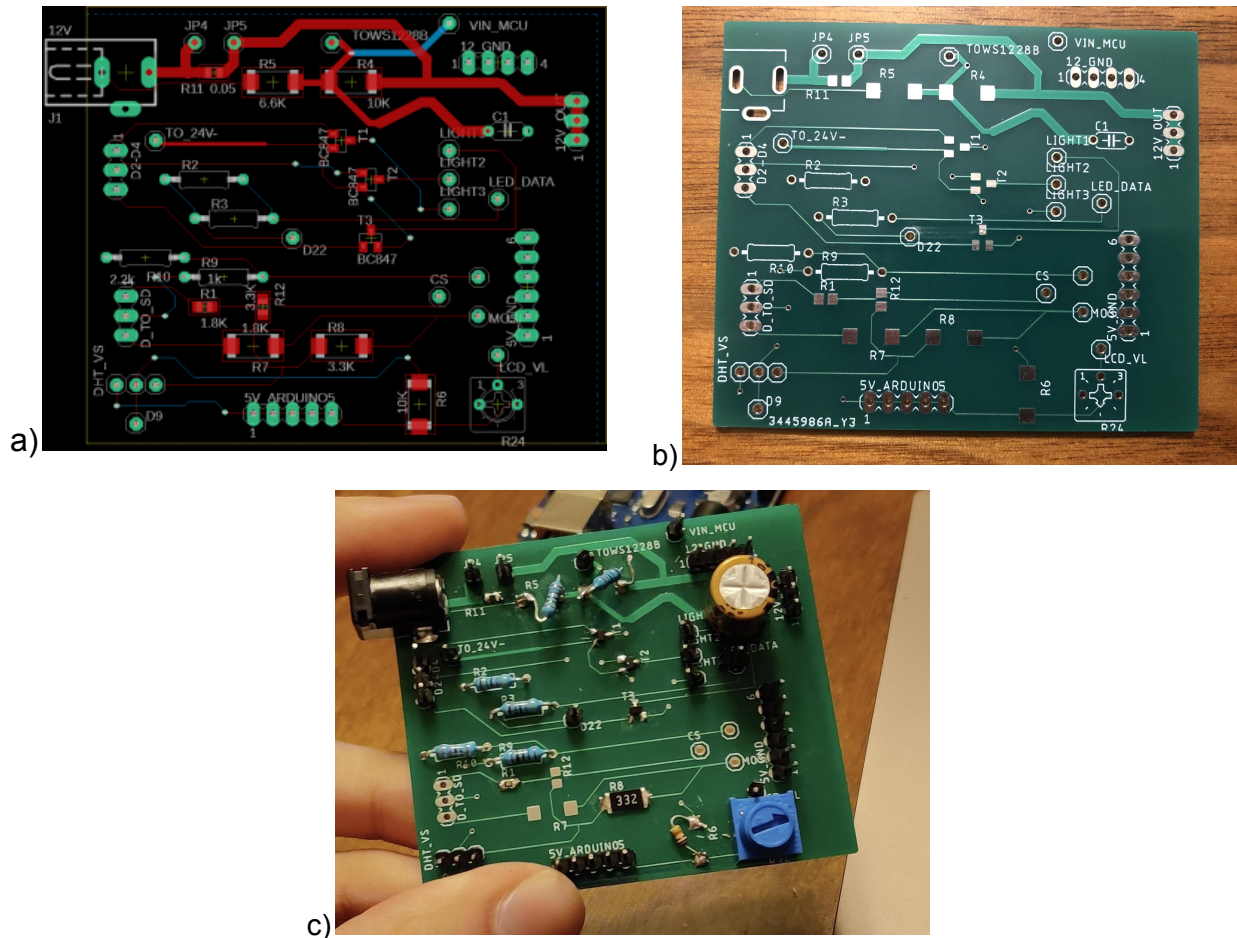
a) PCB Layout in Eagle b) Manufactured PCB
